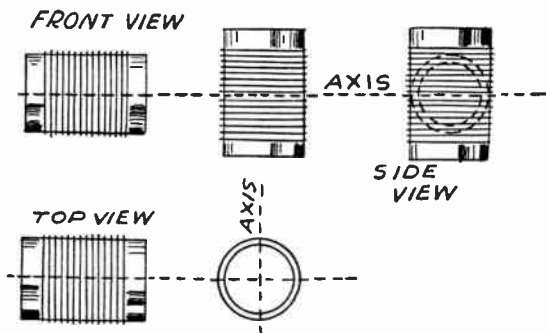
Coils Properly Aligned for Minimum Coupling Angle.
